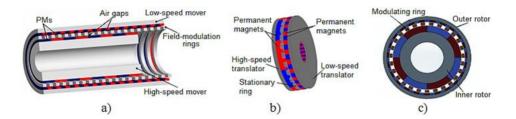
Field-modulated magnetic gears a) Linear magnetic gear [25], b) Axial magnetic gear [21], c) Coaxial magnetic gear (CMG) [23]
